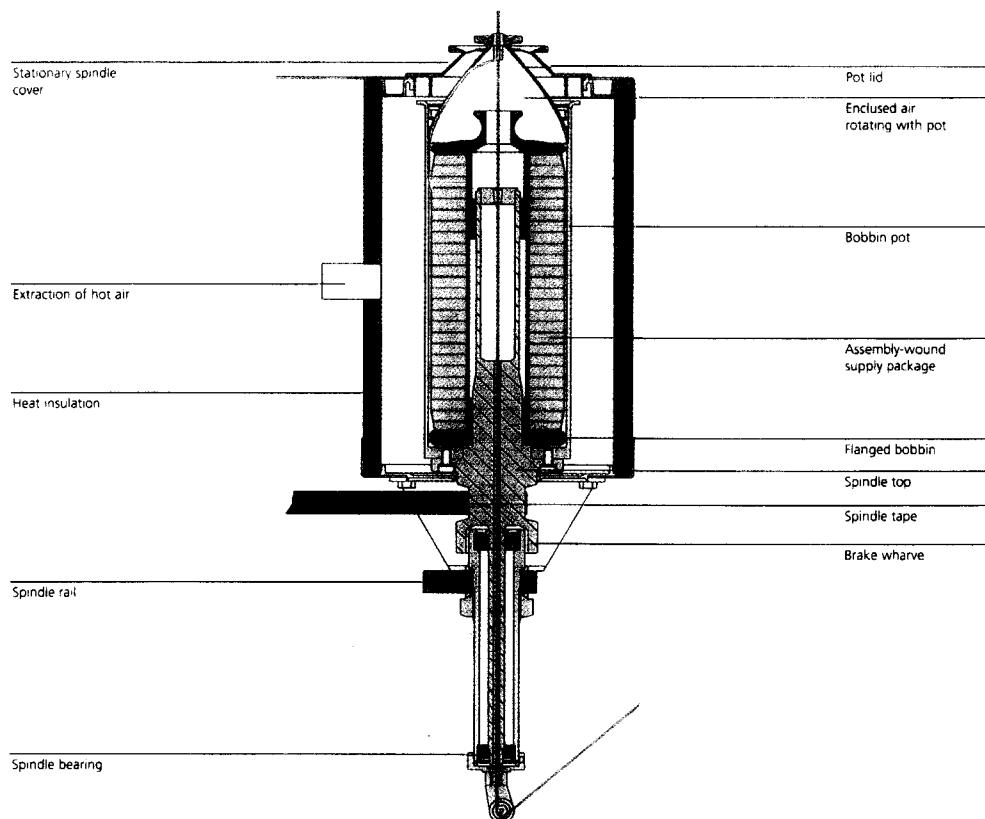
Spindle of covering machine, saurer elastoTwist (HAMEL).
